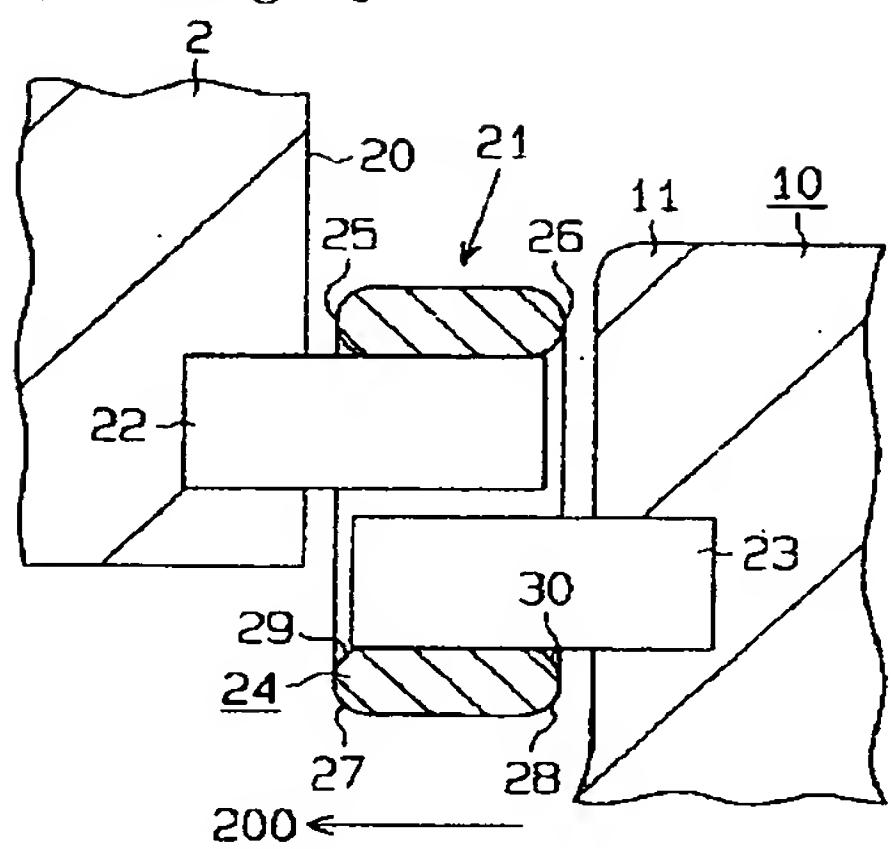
It is a section enlarged drawing of a rotation blocking mechanism.
